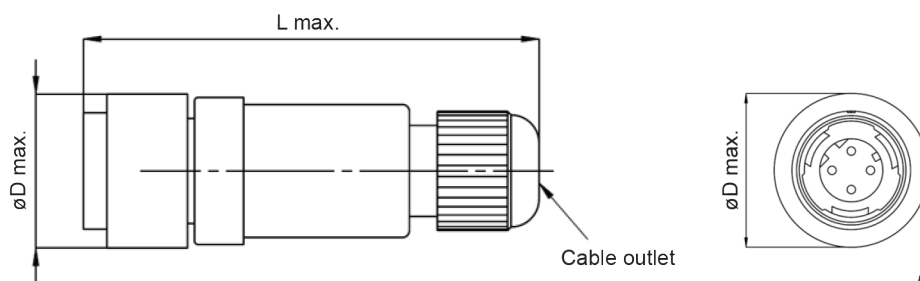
Style JF_PPI_PPO – Rewireable connector, with female contacts, straight version, with inner and outer push-pull locking
